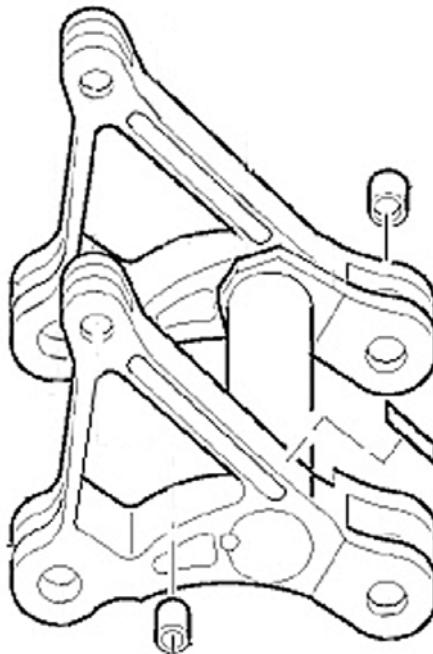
Aft Longitudinal Bellcrank Assembly (AH-64A/D)
